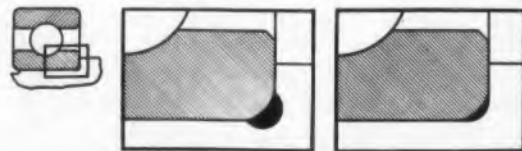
Approved methods of obtaining corner clearance are, left, undercut or, right, shoulder fillet radius less than maximum listed by manufacturer for bearing used.
